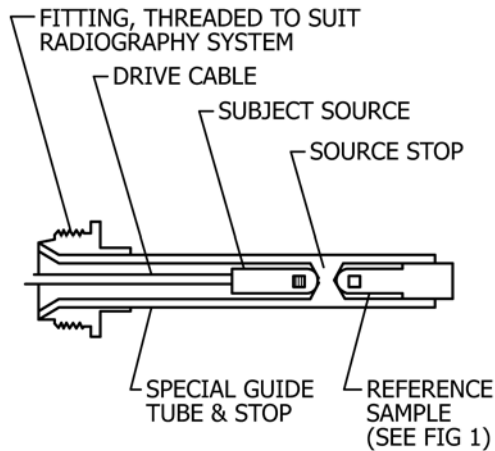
Typical Arrangement Using a Specially Designed Guide Tube
